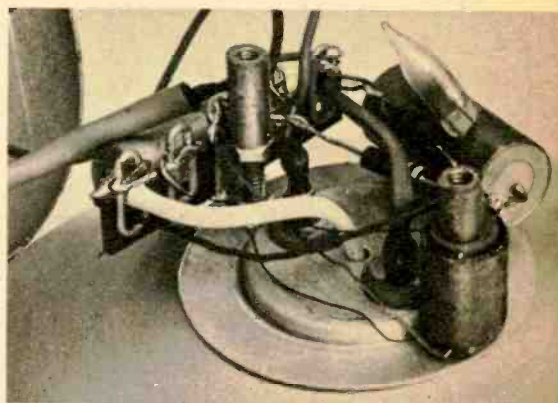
Back of flash head. Threaded spacer on terminal-strip mounting screw is 3/8 in. long. The threaded spacer that holds T2 is 1/4 in. long.
